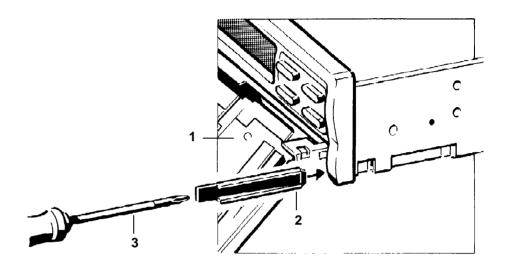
MTCO 1324: Retrofitting removal guides
